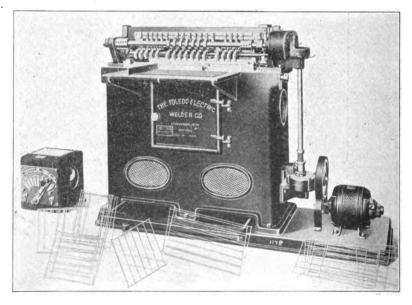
Electric Welder Capable of Welding Sixteen Wires at One Time
